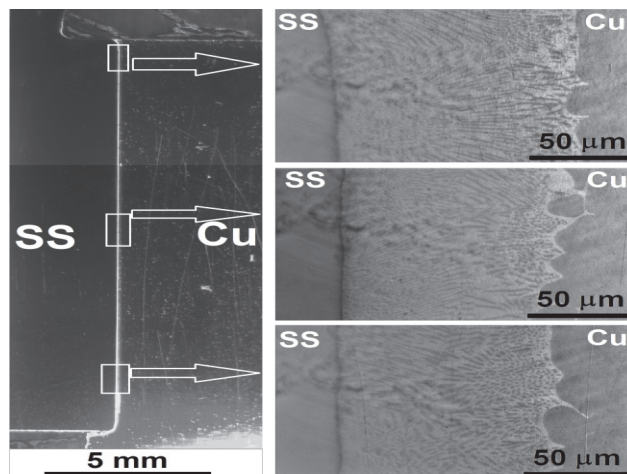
Cross-section of brazed component, presented in Fig. A.12.2, showing complete penetration of BFM across 18 mm long capillary joint.
